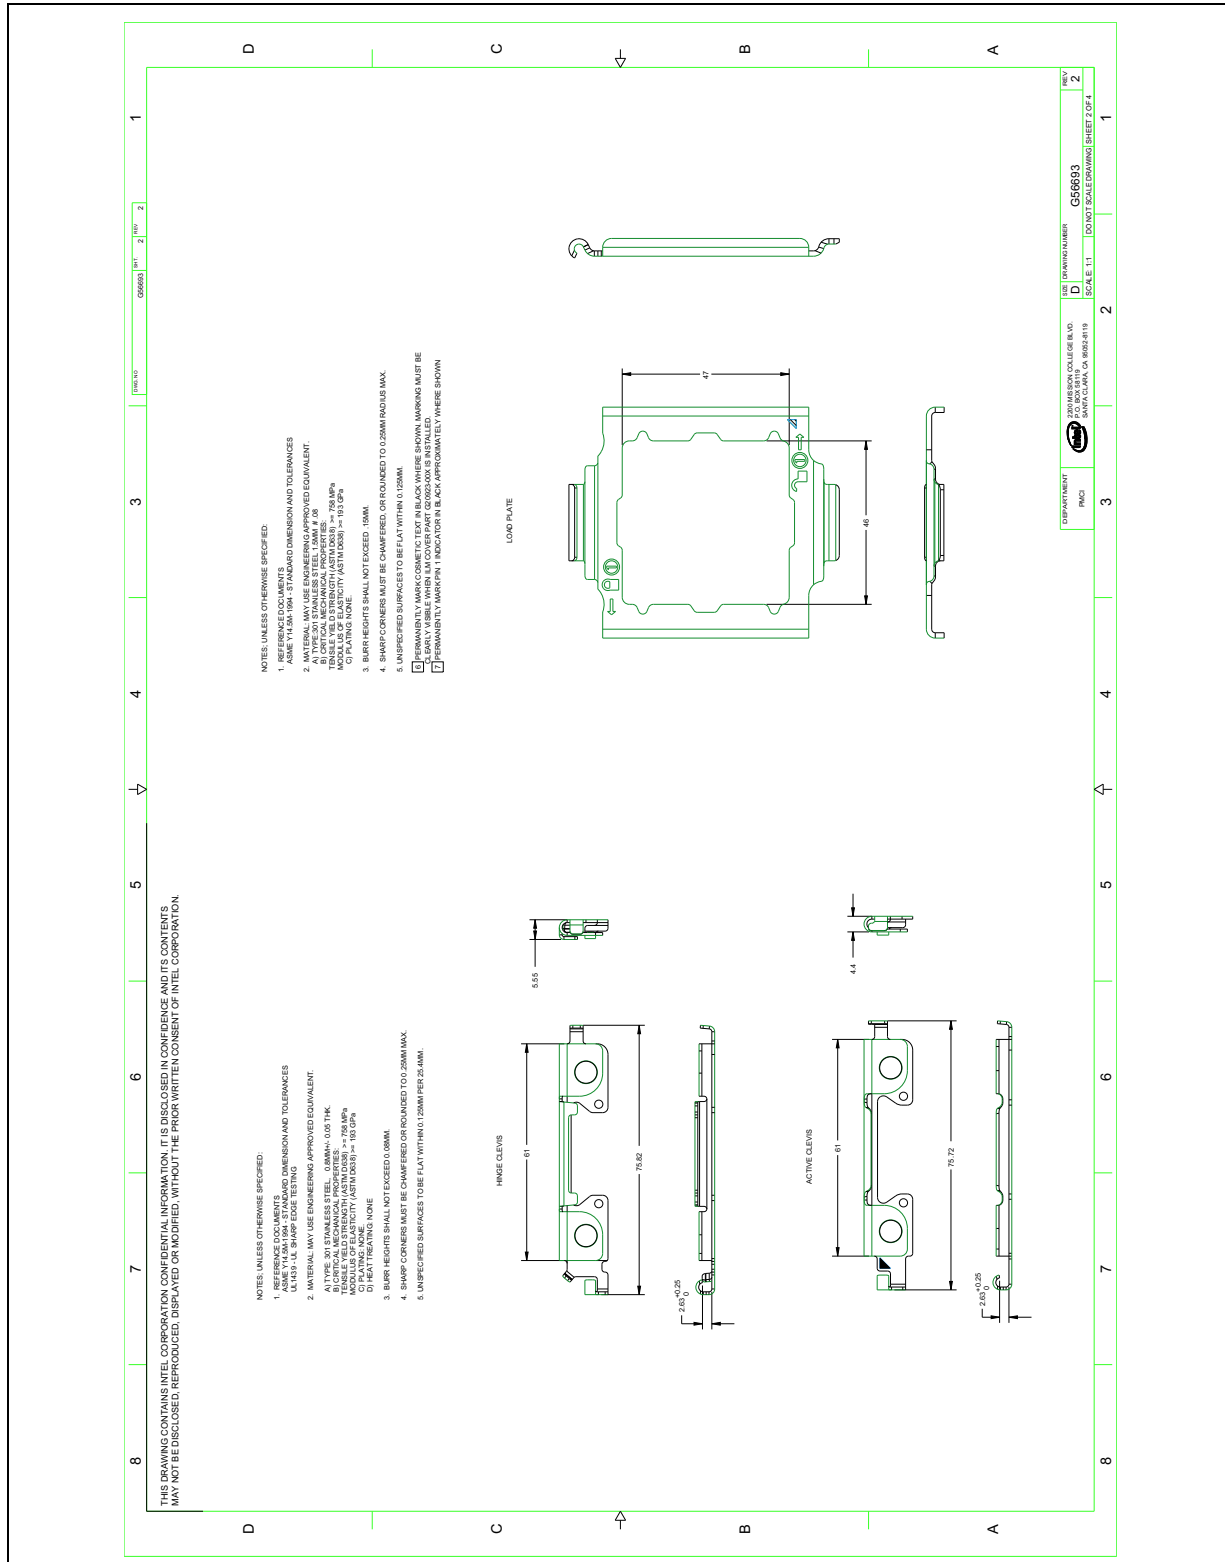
ILM Mechanical Drawing - G56693 Rev 2 (Sheet 3 of 4)
